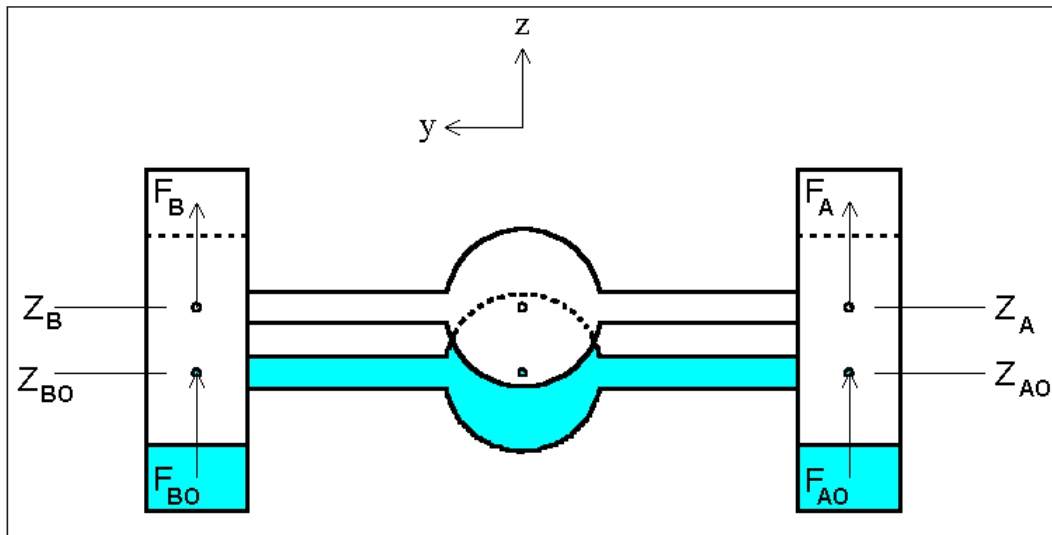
Axle Housing Schematic for Vertical Stiffness Test (Rear View of Axle Housing).
